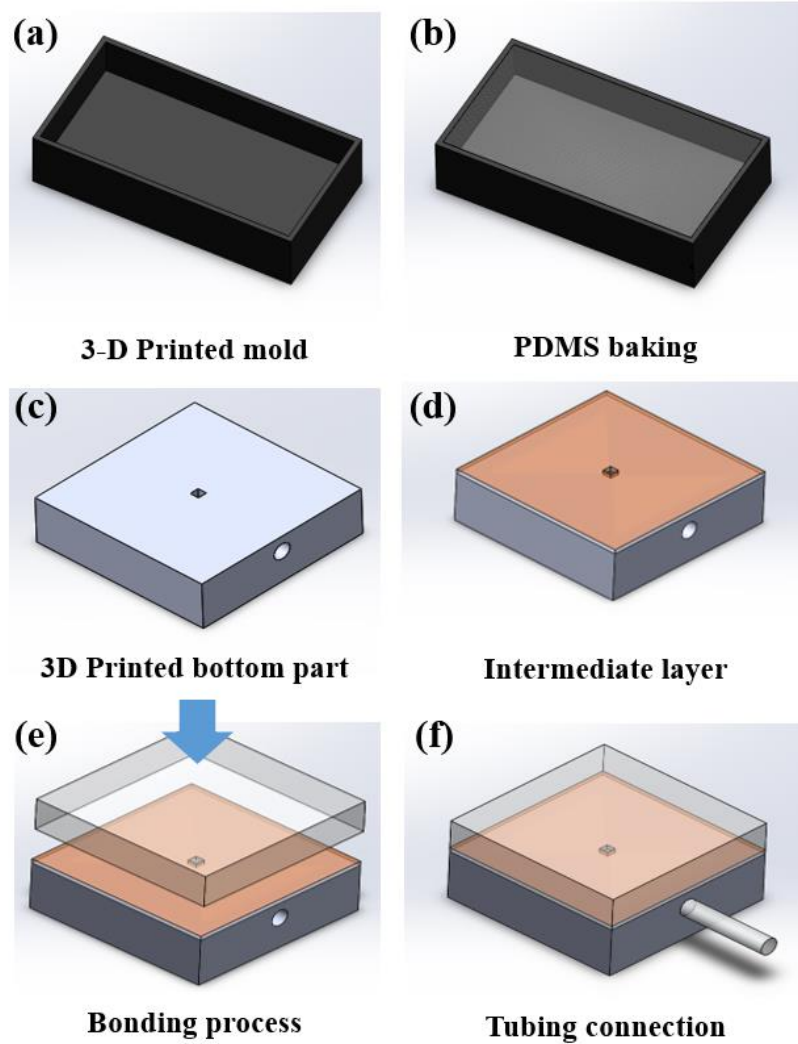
Fabrication process of the PDMS/Intermediate layer/3D-printed bottom part. (a) Printing the PDMS mold master. (b) PDMS baking. (c) Fabricating the 3D-printed bottom part using DLP 3D printer. (d) Intermediate layer on top of the 3D printed bottom part. (e) Bonding process of the top PDMS part/3D printed bottom part with an intermediate layer. (f) Connecting a Tygon tubing to the burst test structure.
